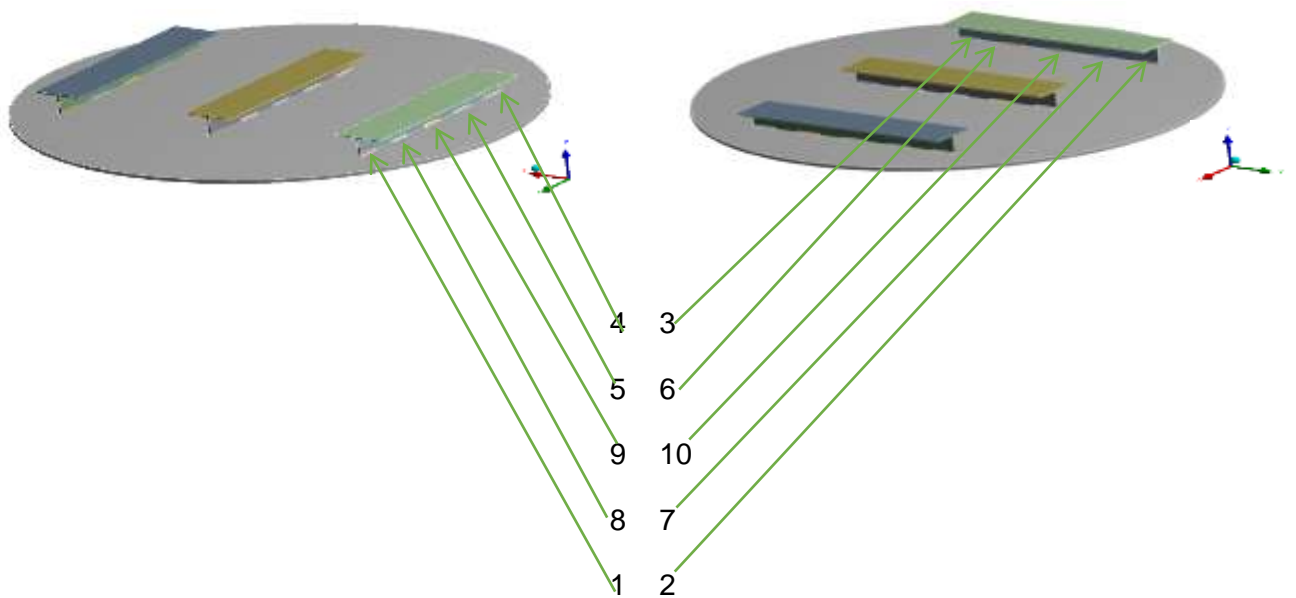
End to End transverse zig-zag welding (WS-3)
